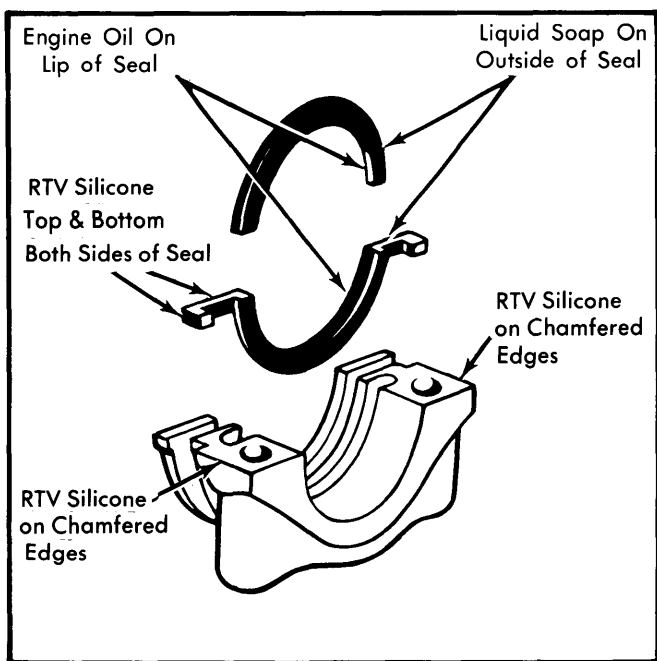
Rear Main Oil Seal Installation Instructions (Note Where RTV Silicone Should be Applied)
